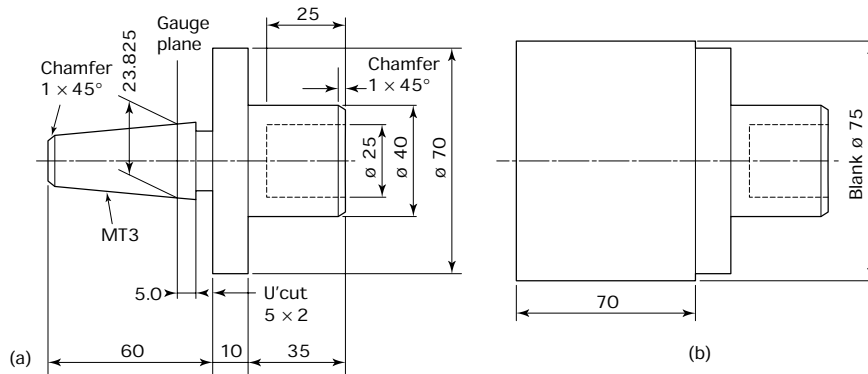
Component requiring second operation machining: (a) finished component; (b) component as turned in three-jaw chuck ready for second operation work (dimensions in millimetres)
